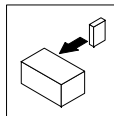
Dimensions 8215 - 8218: Standard assembly
